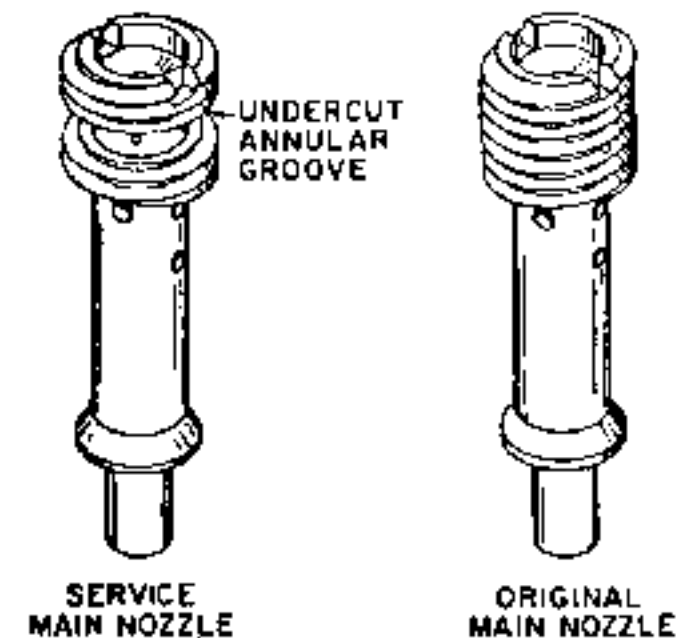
The main nozzle originally installed is drilled after installation through hole in body. Service main nozzles are grooved so alignment is not necessary.
